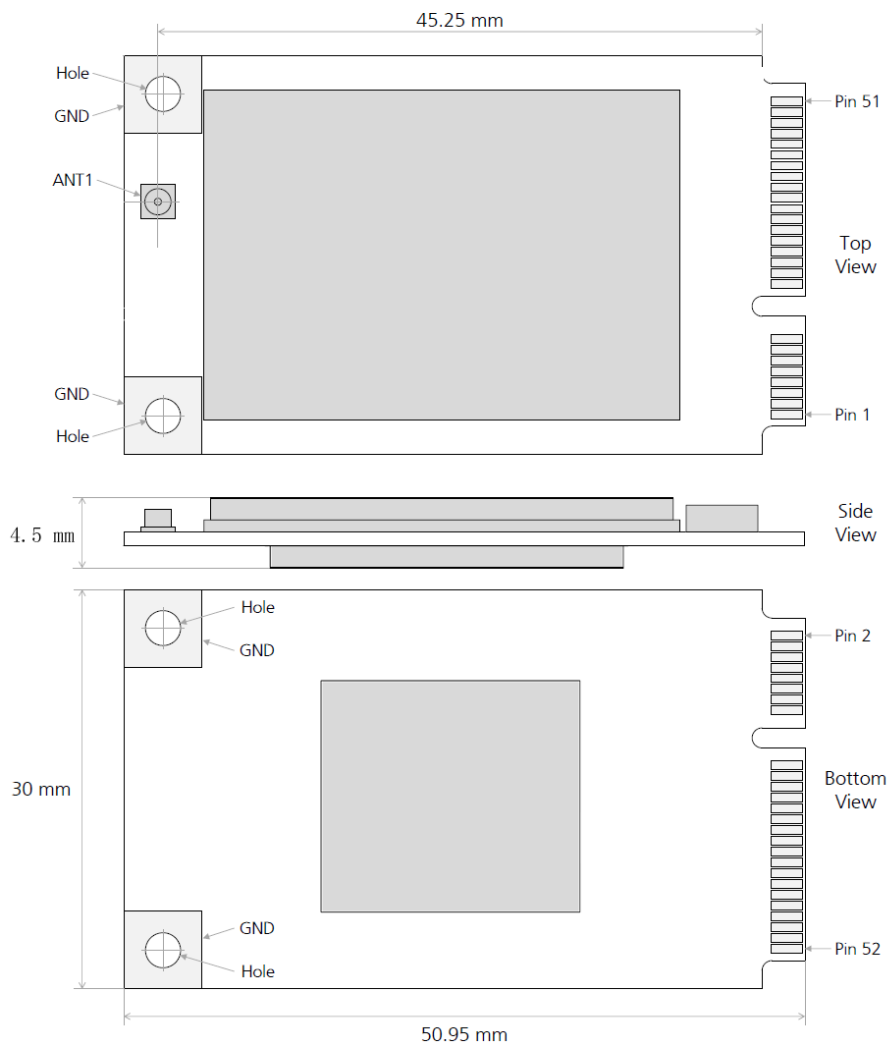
| RAK2247 card mechanical dimensions (top view, side view, bottom view)
